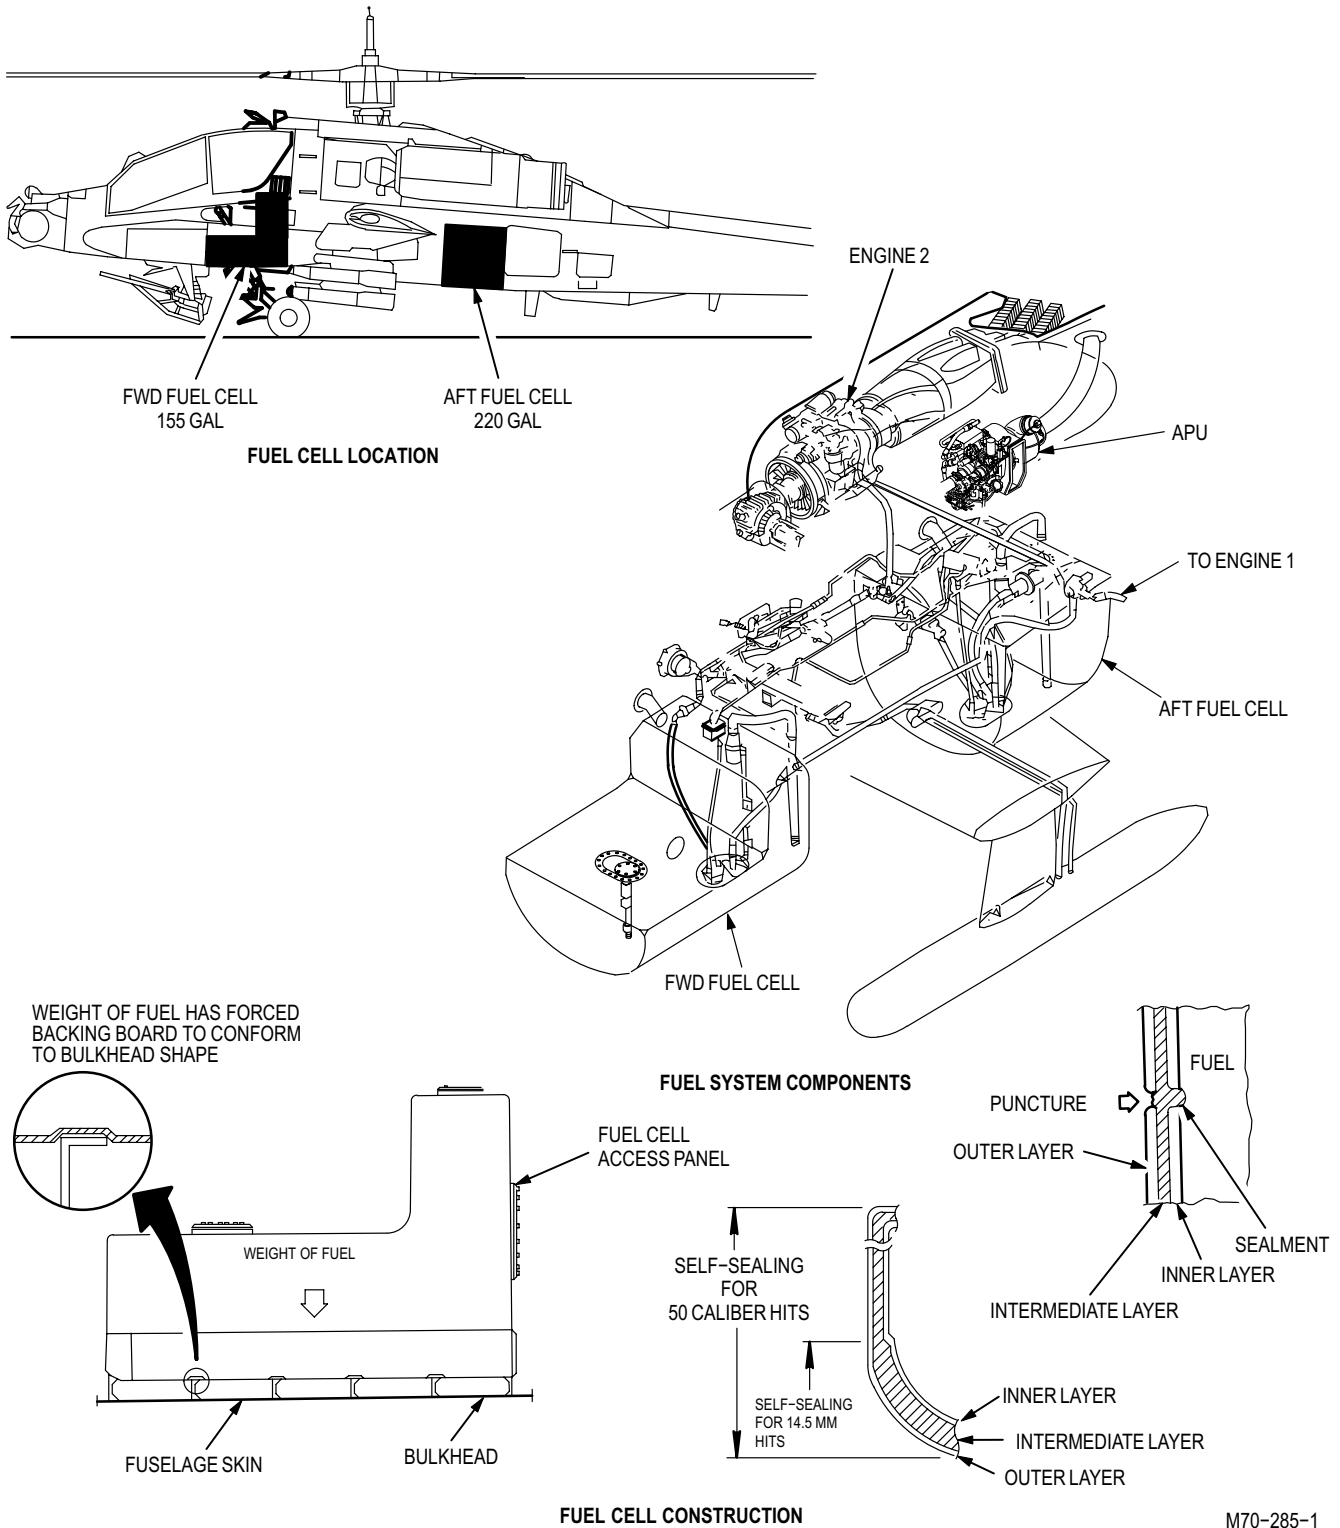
Fuel Storage System Major Component Location (Sheet 1 of 3)
